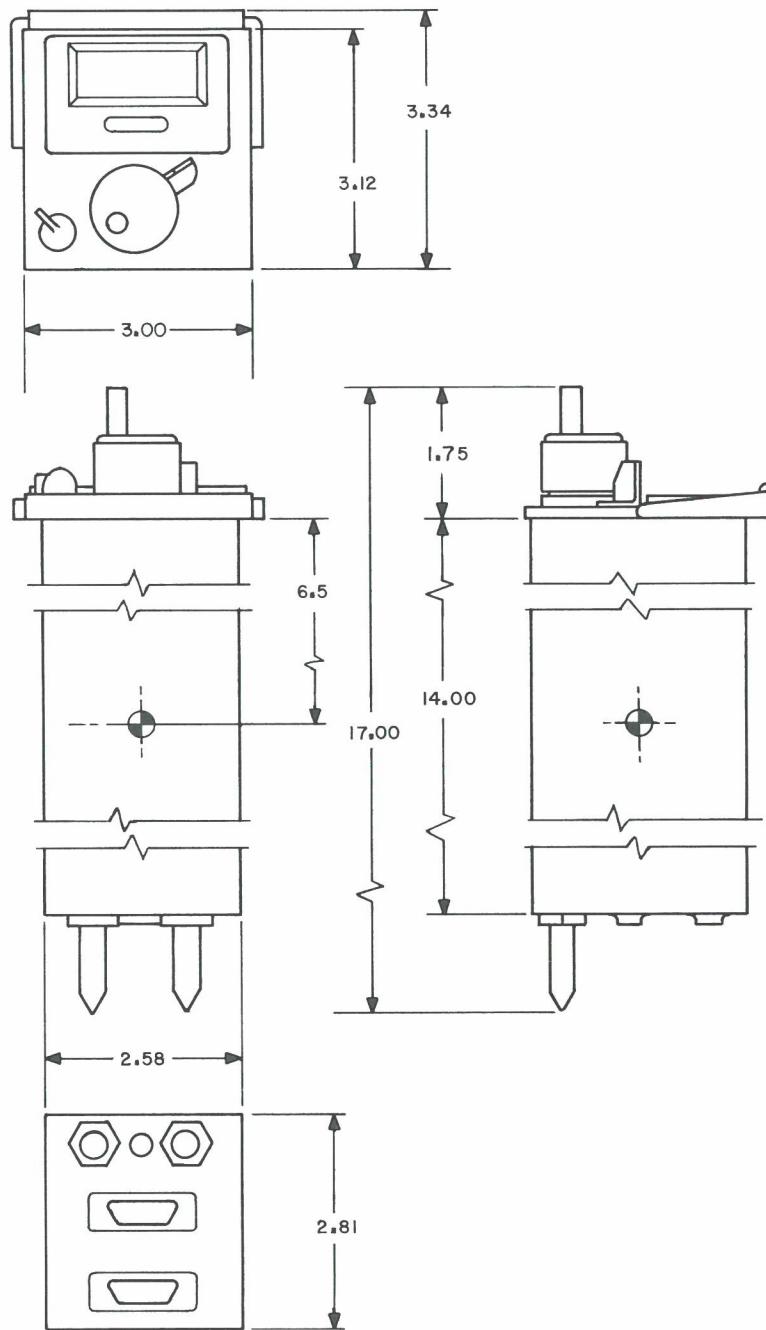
Type VH-11 Tuning Head, Critical Dimensions
